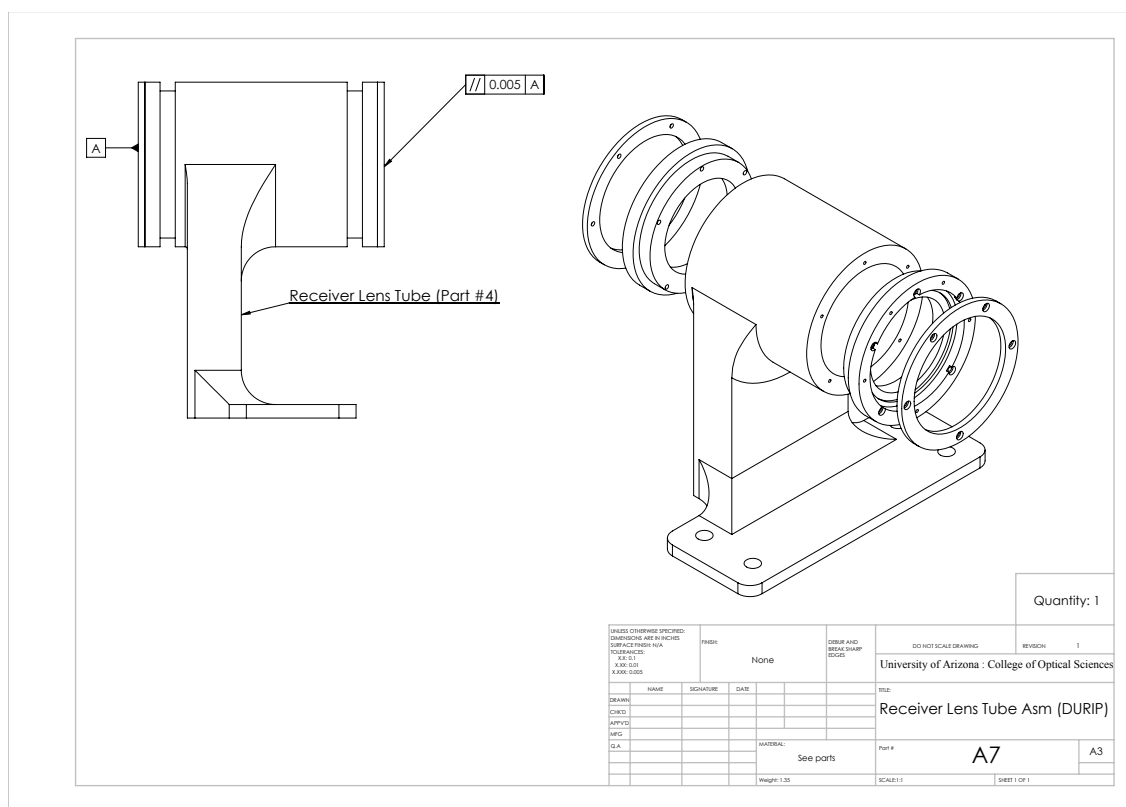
Receiver afocal lens mount assembly. The modified Samsung adapters are shown exploded in the bottom right view. Zoom in for detail.
